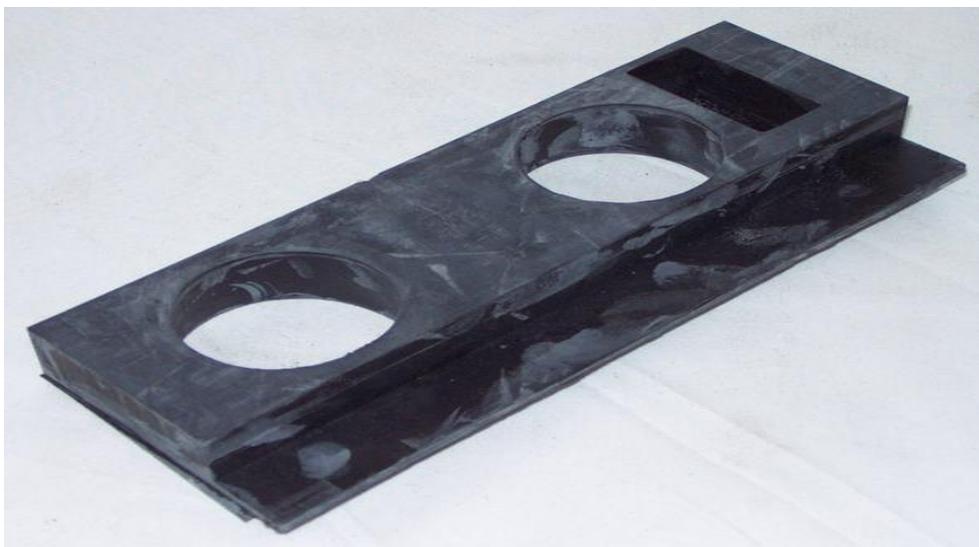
The solid rubber seal showing holes for tubes and square recess for the flap controls
